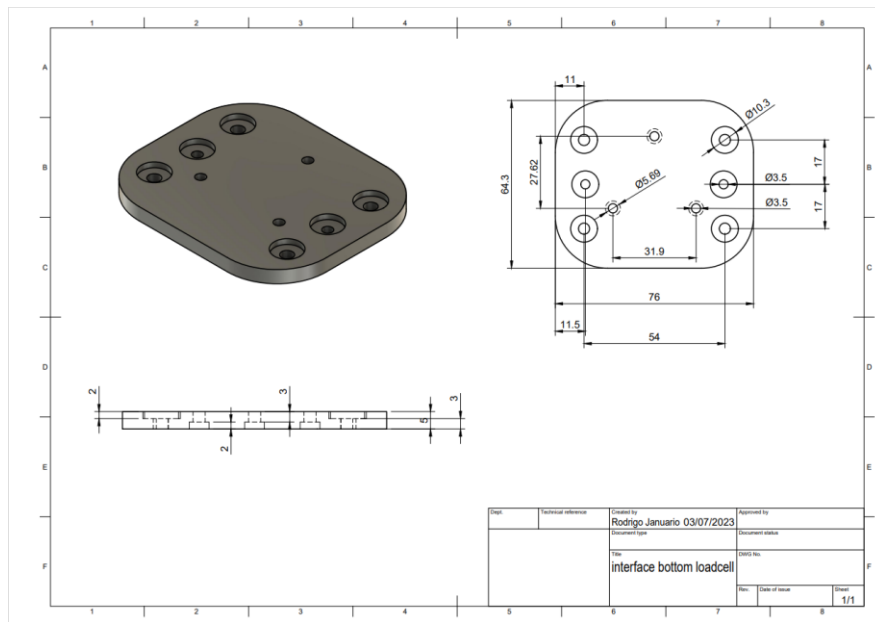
Drawing interface bottom of force sensor and its measurements.
